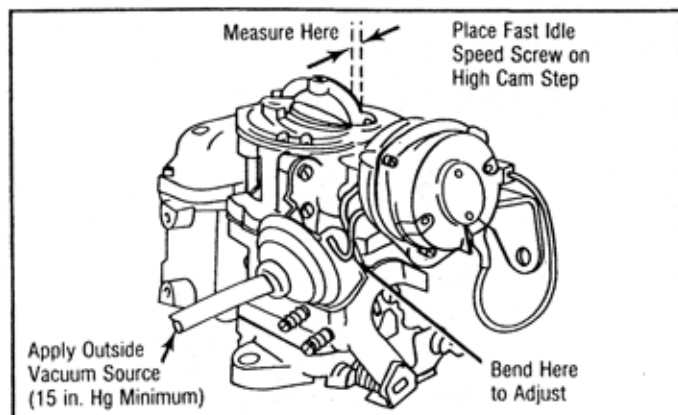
Initial Choke Valve Clearance Adjustment (Models With Choke Vacuum Diaphragm)
